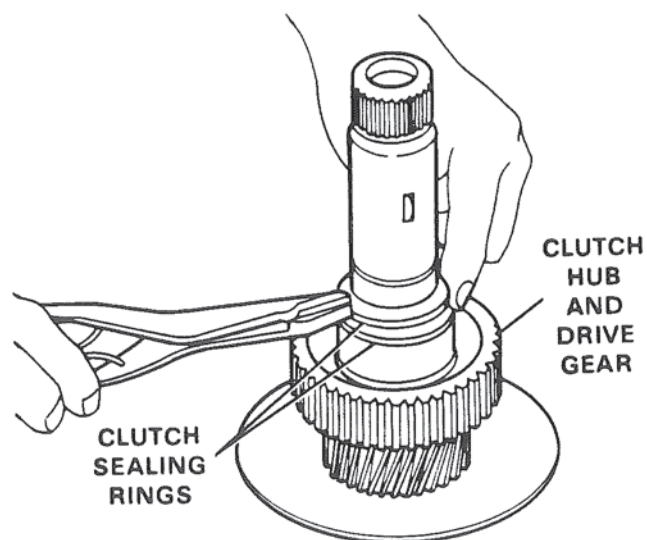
Installing Forward Clutch Sealing Rings onto Drive Gear.
